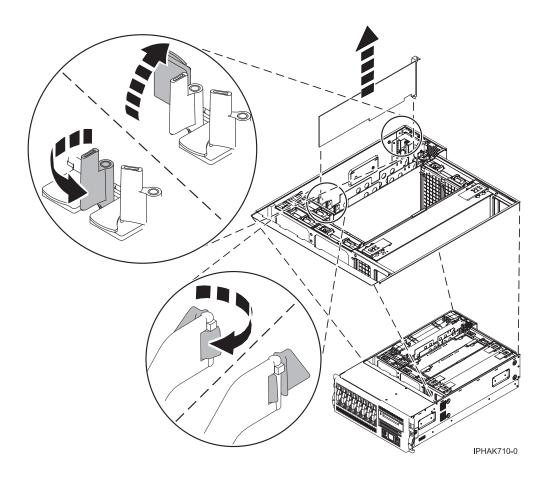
PCI adapter or filler plate removed from the rack-mounted unit
